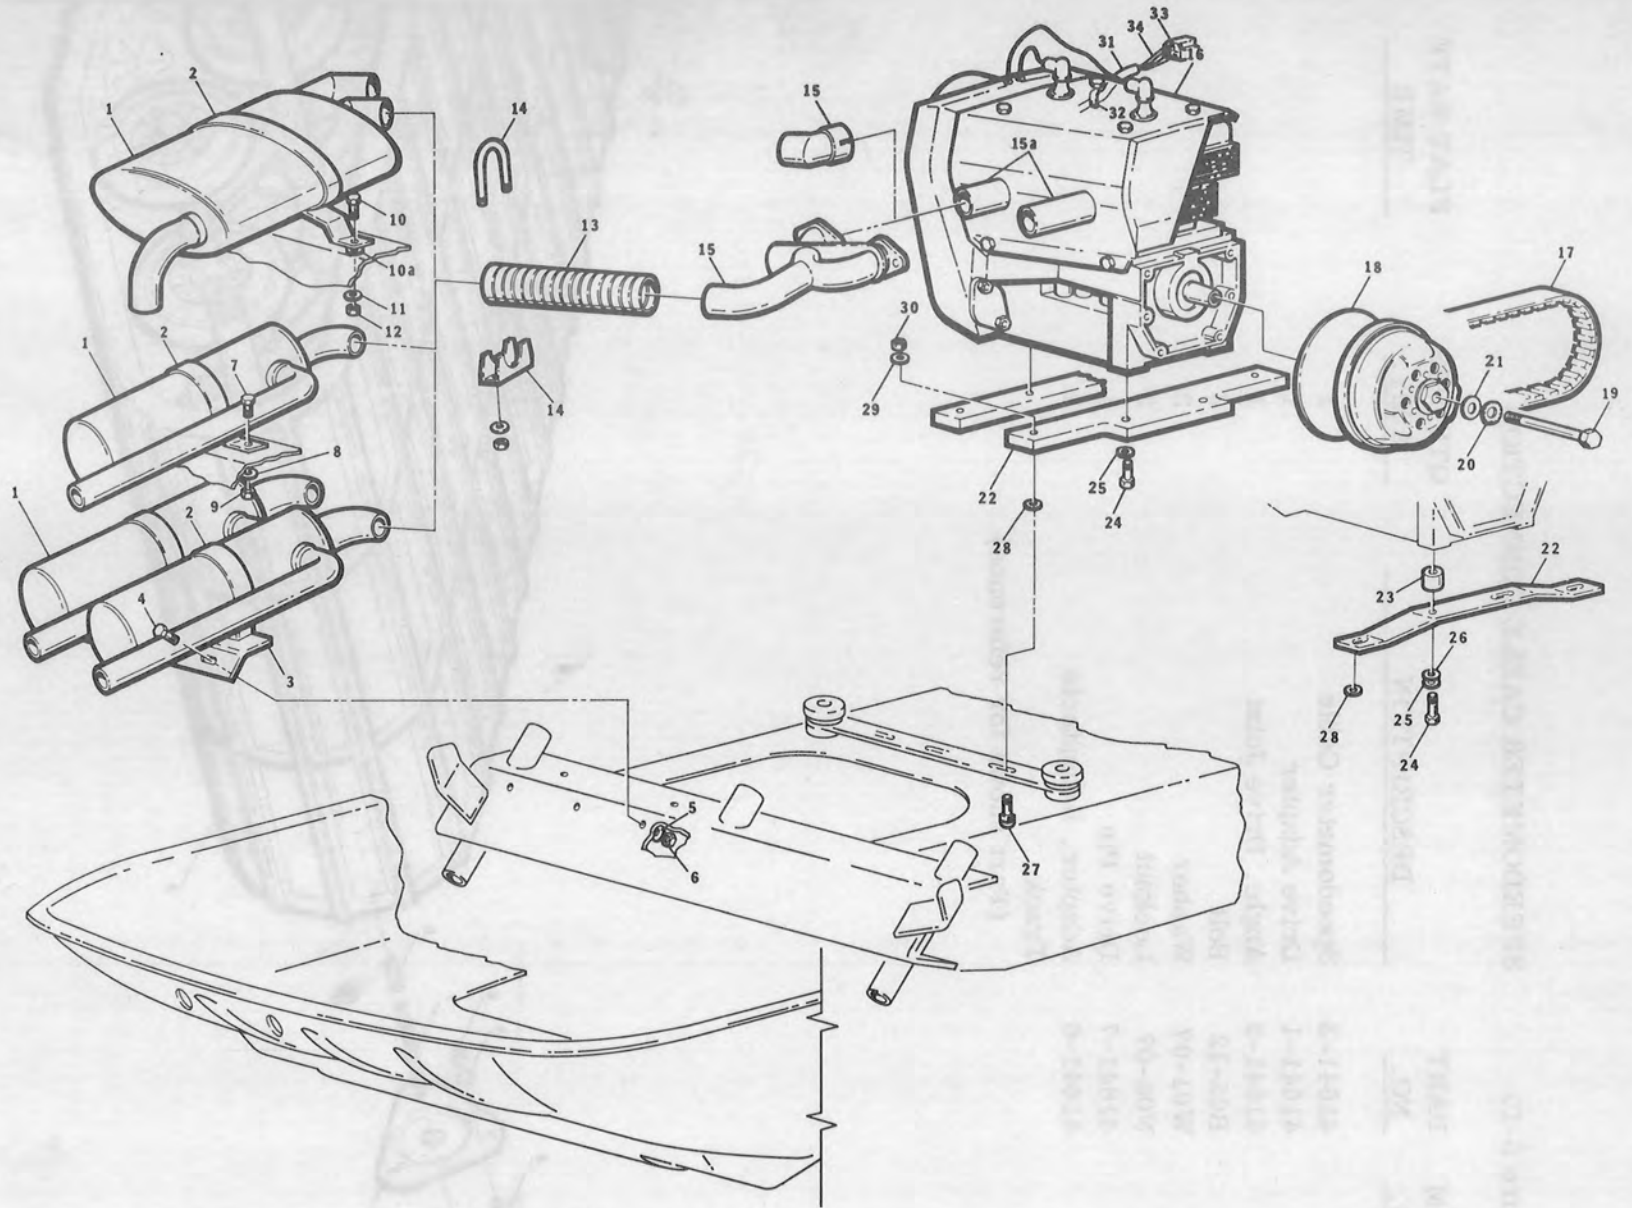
MUFFLER AND ENGINE MOUNTINGS - HIRTH
